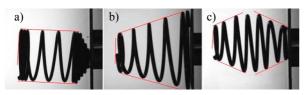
Different spring types (a: cylindrical spring; b: single-conical spring; c: double-conical spring)
